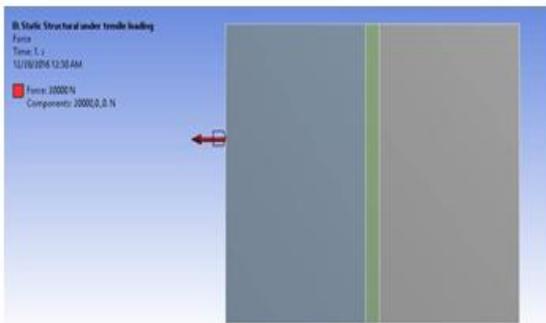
Application of tensile load of 20KN on Butt weld joint
